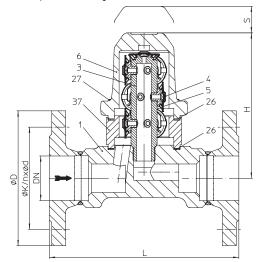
1....10K2 (NPS 1 1/2" - 2") with 10 capsules, with flanges
